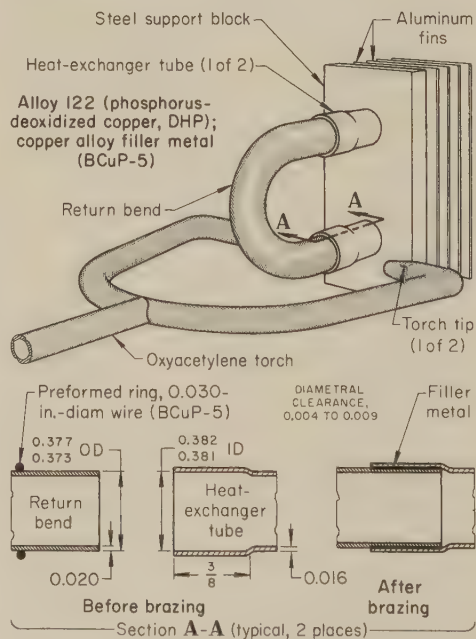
Return-bend assembly of a heat exchanger, and a dual-tip torch used for rapid heating of the self-fluxing filler metal (Example 642)
